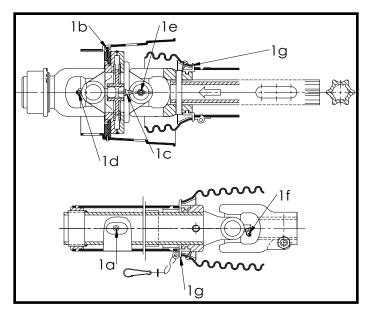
PTO Shaft - Slip Yoke & Universal Joint
